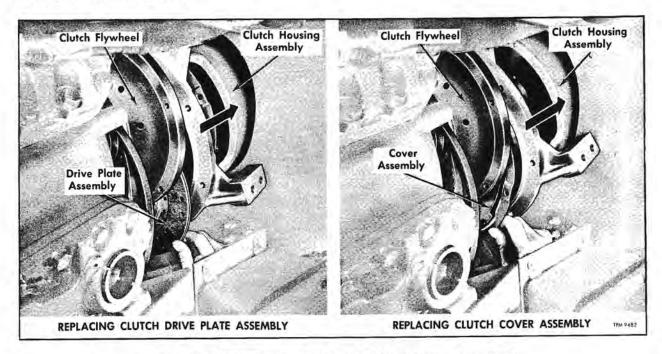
Replacing Clutch Drive Plate and Cover (Compressor in Coach)
